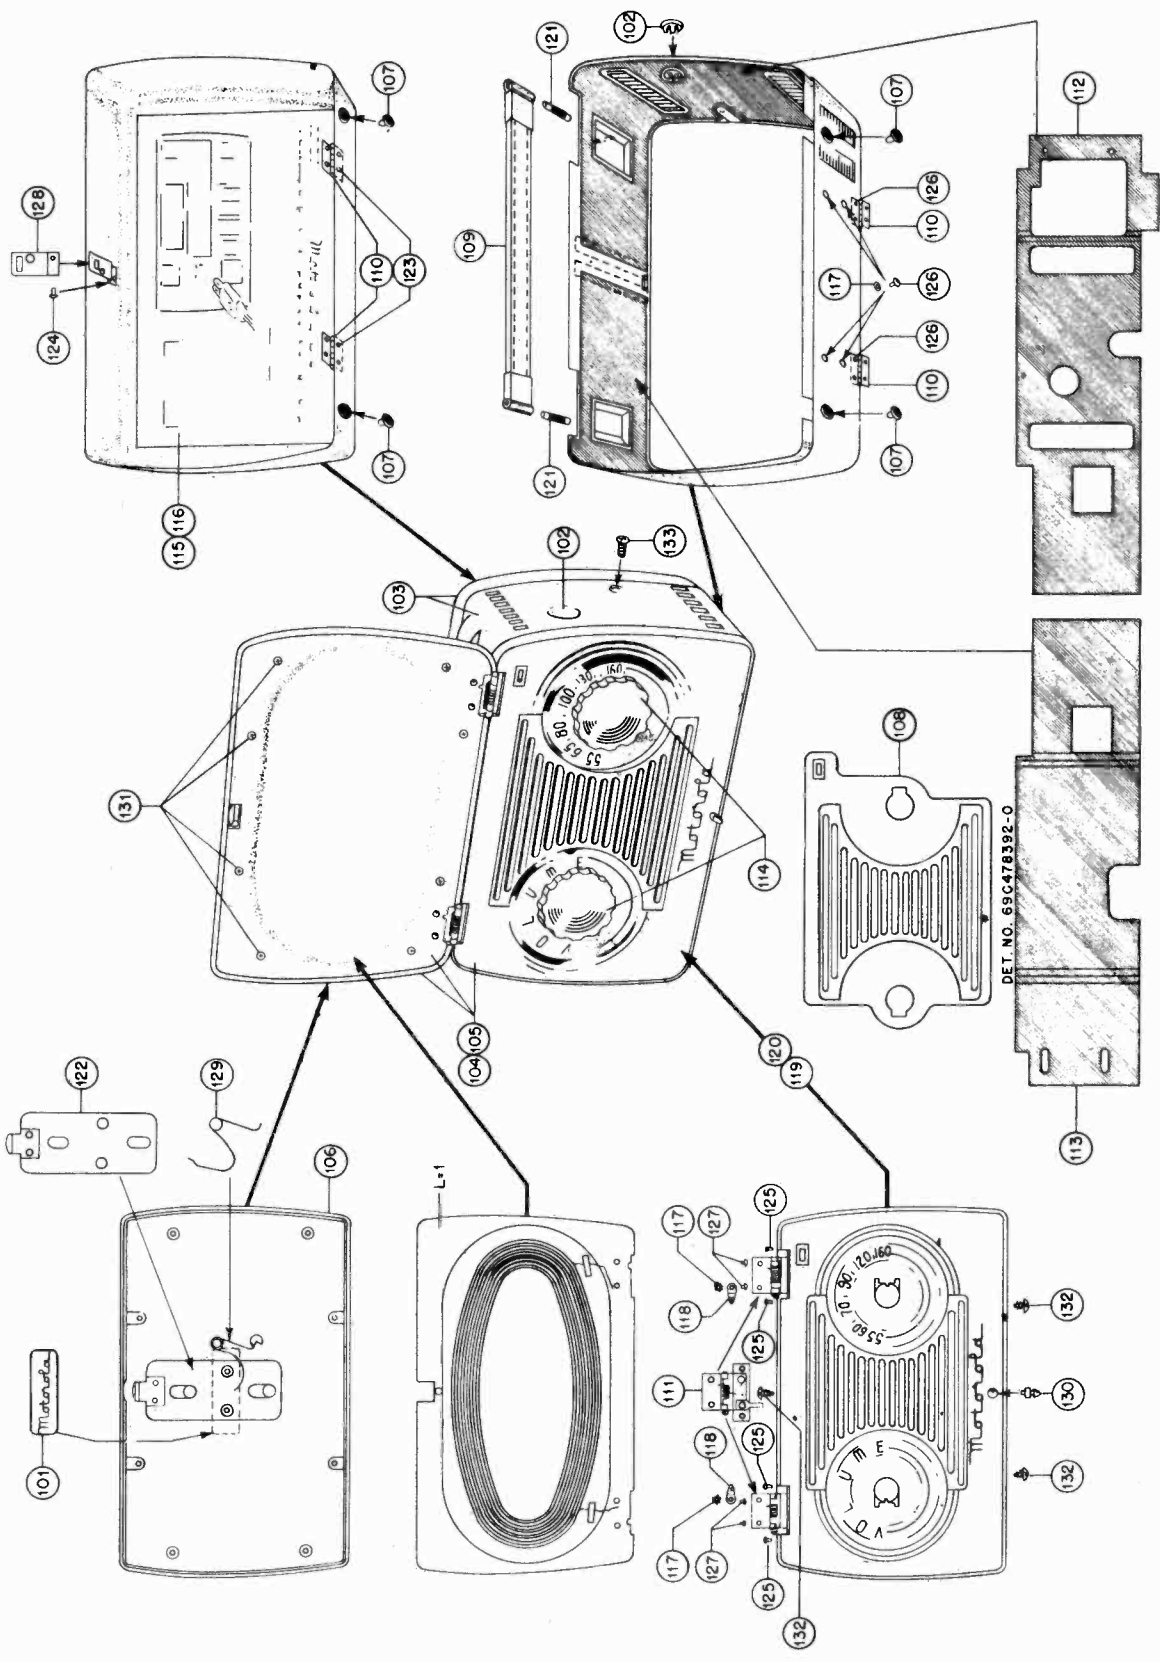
MODELS 5A7 & 5A7A CABINET PARTS LOCATIONS
